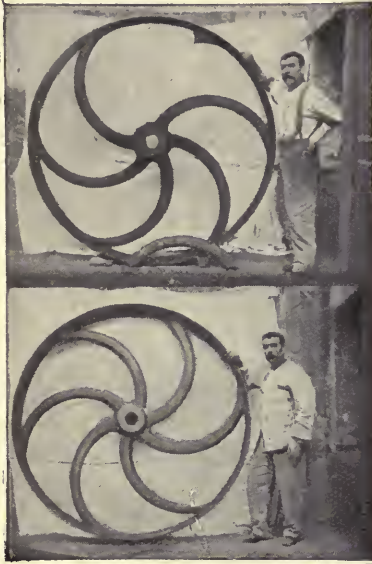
Repair of a cast-iron flywheel by autogenous welding.
